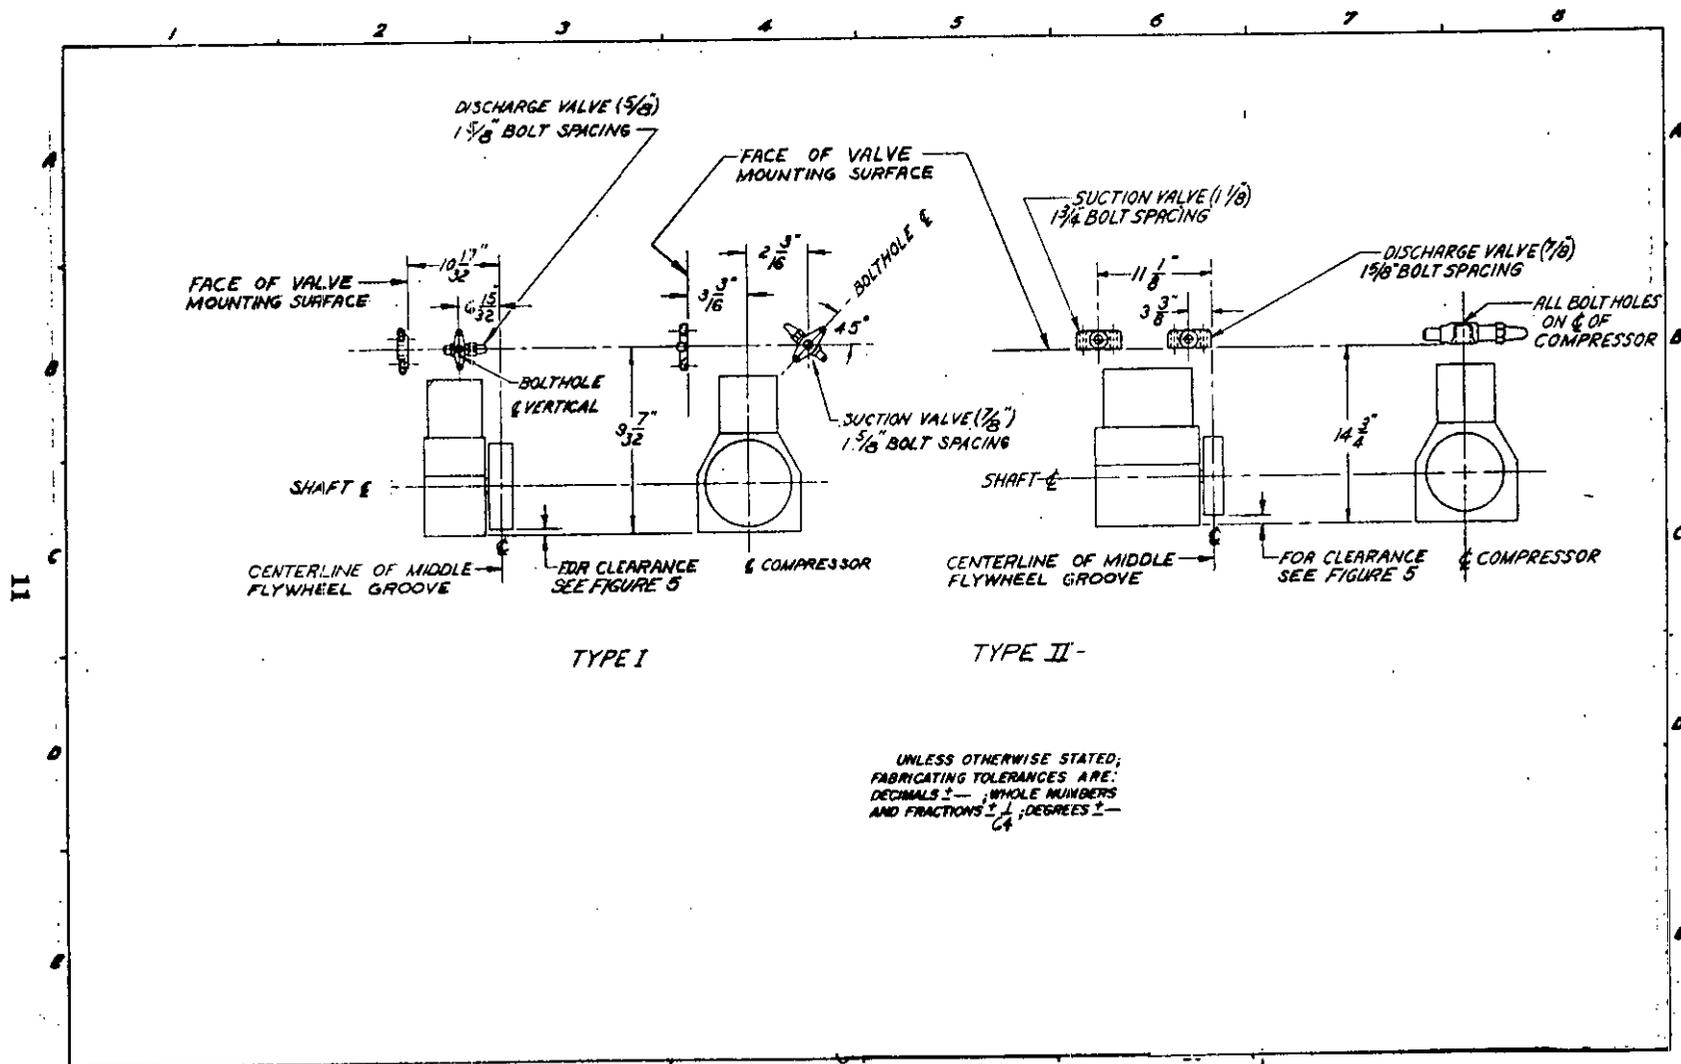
Compressor, reciprocating power-driven, open type, for use with refrigerant 12, suction and discharge service valves flange locations.
